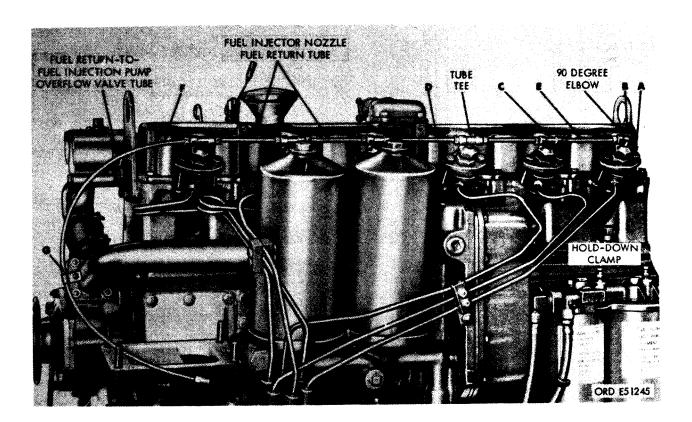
INSTALLING FUEL INJECTOR NOZZLE AND HOLDER FUEL RETURN TUBES.
